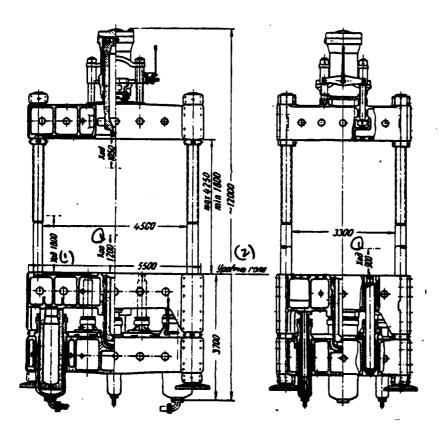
Corner post-type press by effort/force 1500 t for the hot die forging of thick sheets with the lower arrangement of working cylinders.
